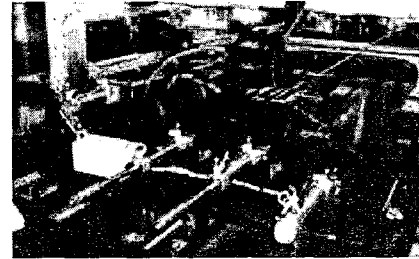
Developed inspection system of automotive fuel pipe
